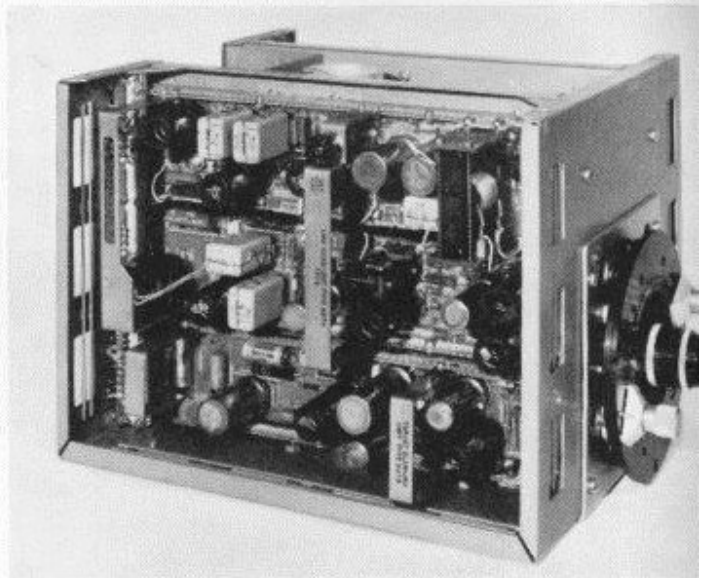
The Mark IV Vidicon Camera with its covers removed showing the printed board construction.
